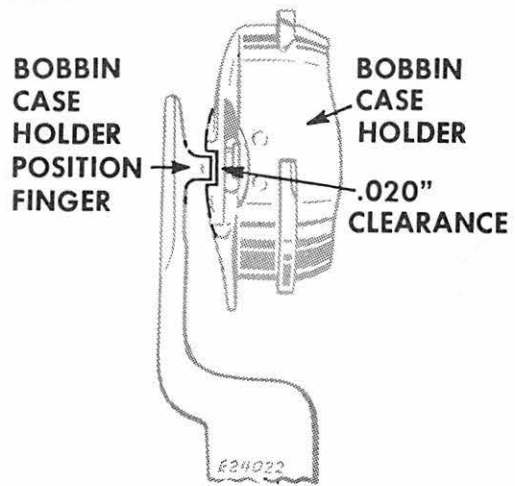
Showing Thread Clearance Between Bobbin Case Holder Position Finger and Bobbin Case Holder
